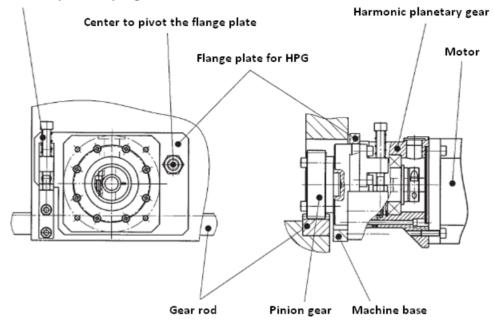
Water-jet Cutting Machine Fast Linear Axes
